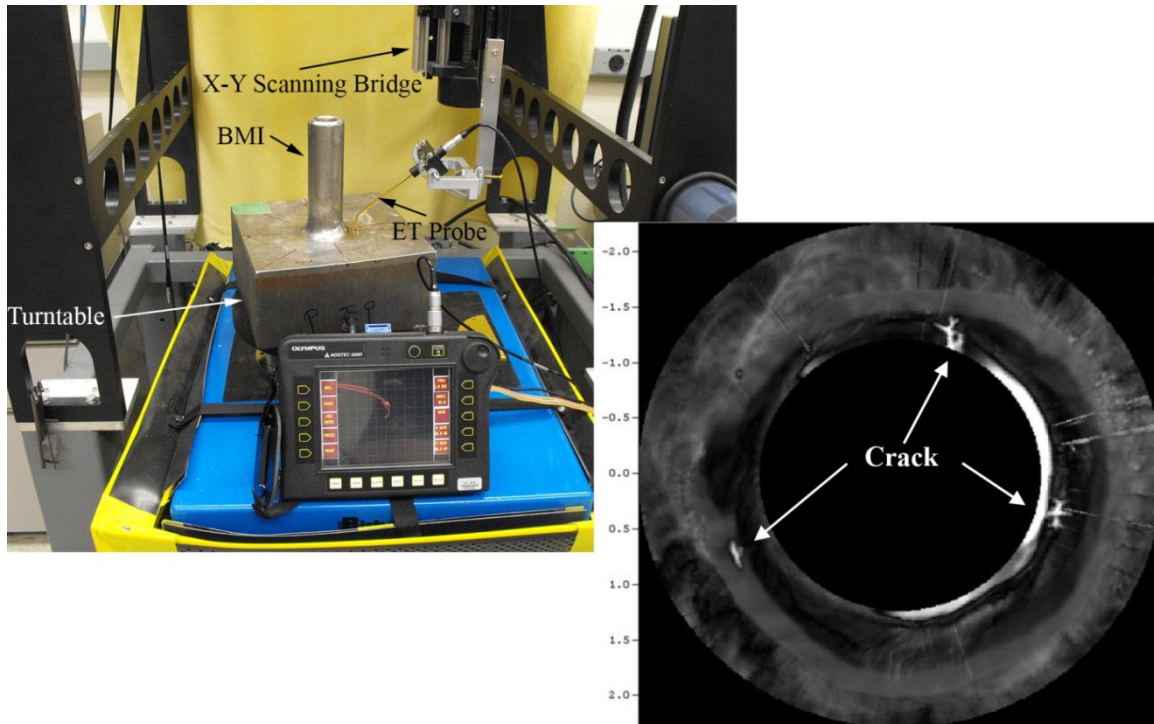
Eddy Current Examination of Bottom-Mounted Instrumentation Nozzle Penetration J-groove Weld
